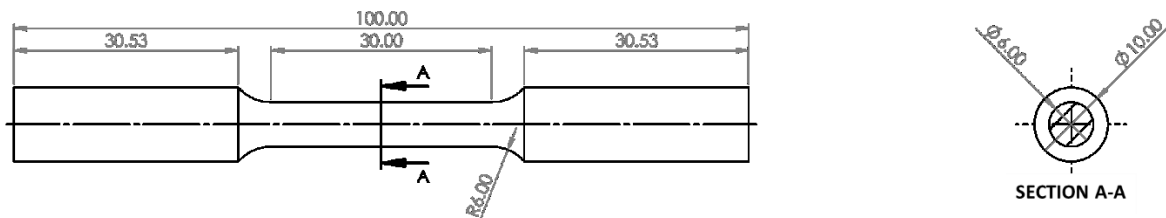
Geometry of the machined tensile specimens tested using MTS 858 Mini Bionix II.
